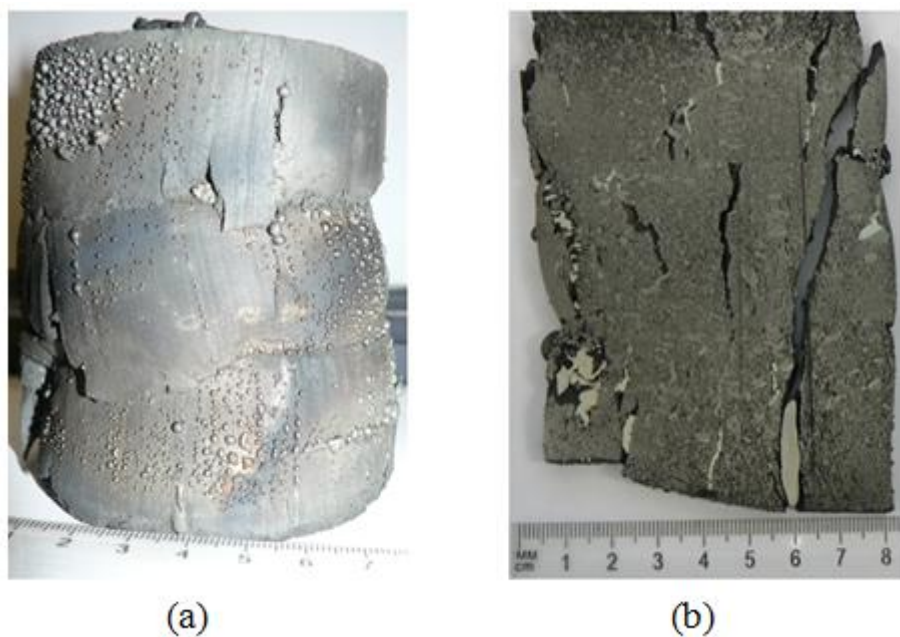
Photographs of the extruded combustion synthesis product (a) before and (b) after sectioning with a wire-cutter
